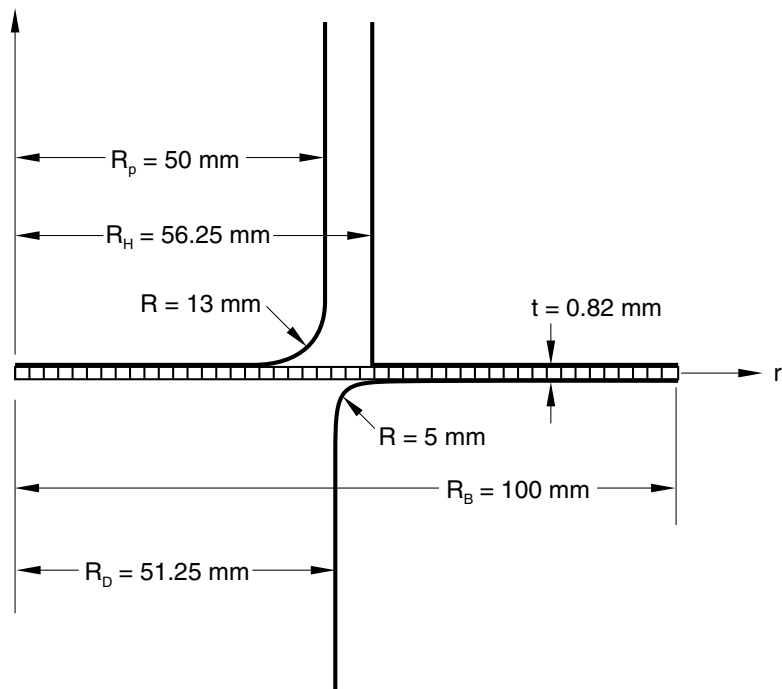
Geometry and mesh for the deep drawing problem.
